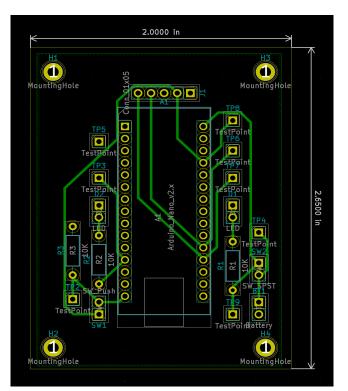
Full size schematic for the PCB with relevant labels, mounting features, and dimensions.
